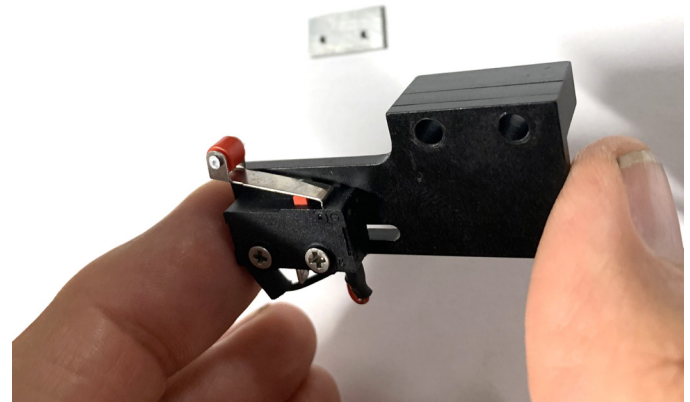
The mounting screws are used to attach the limit switch to the Y-axis limit switch mount.
